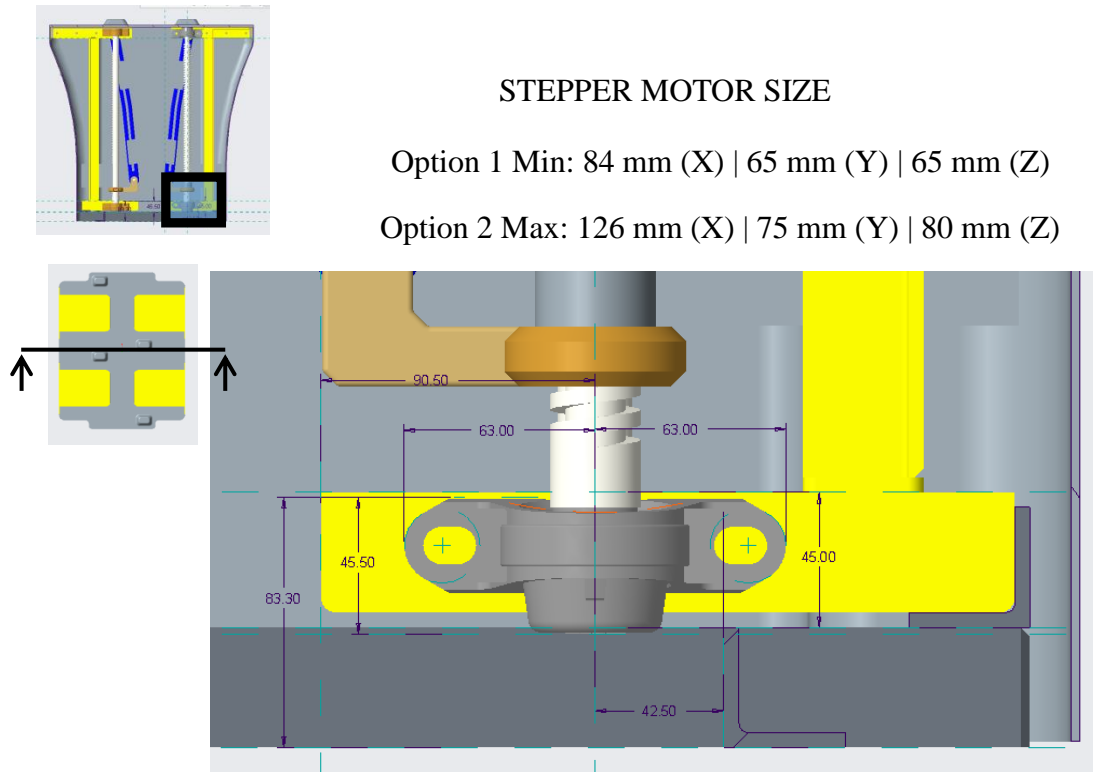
Stepper motor size study for assembly and mounting into DWS mechanism
